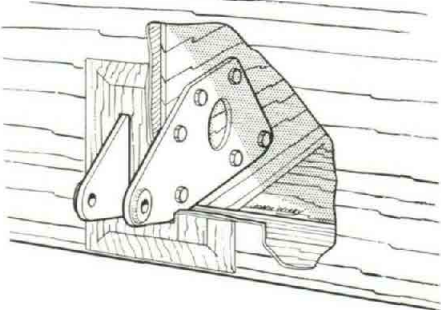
Wing strut fitting on a lower longeron of a wooden fuselage.
